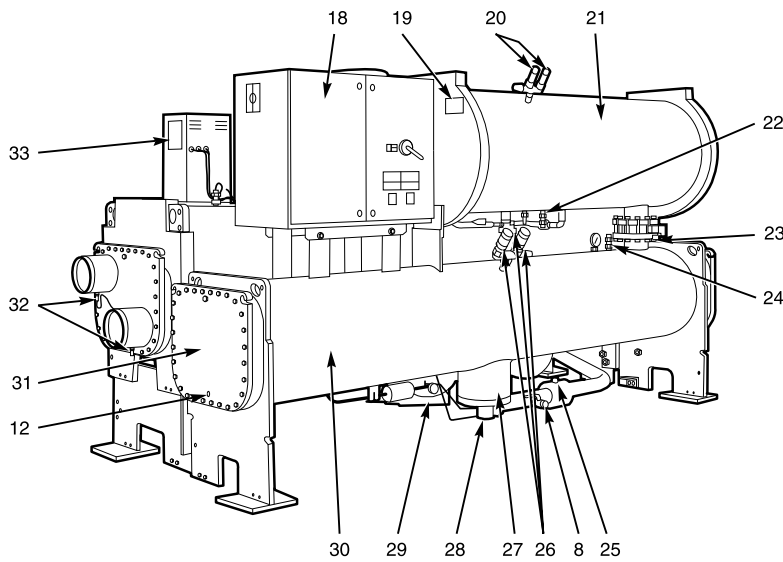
A — Typical 23XL Installation (Frame 1 and 2 Machines)
